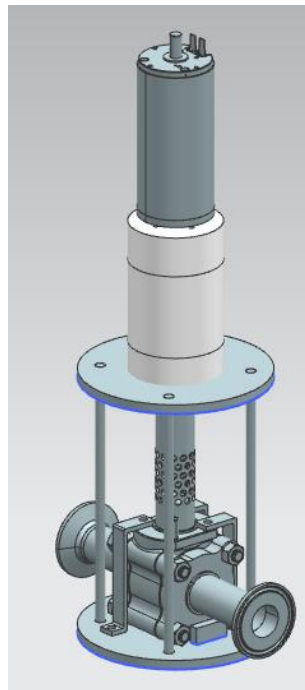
Full Frame Assembly with Valve and Motor Included
